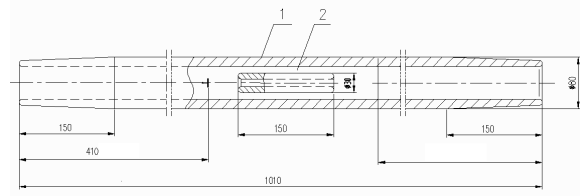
Schematic Diagram of Butt Joint Connecting Tube JYX-1520/125
